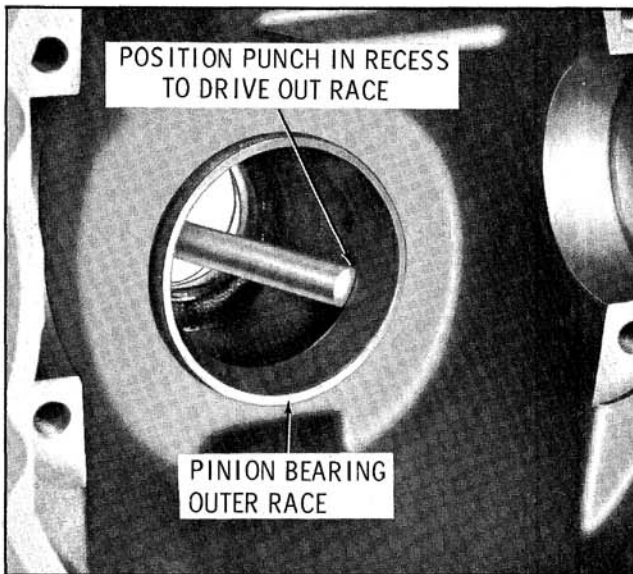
Removing Pinion Rear Bearing Outer Race
